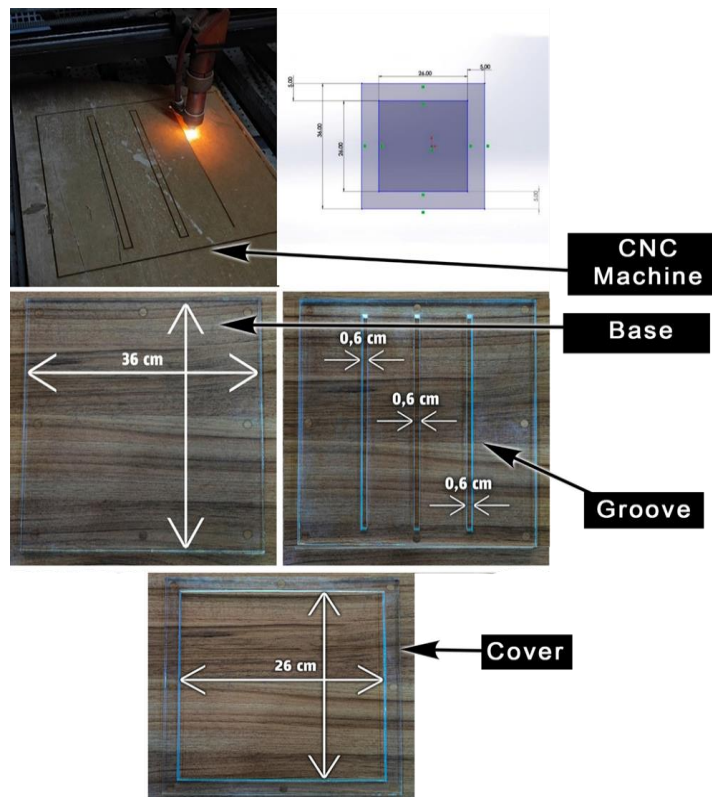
Design an Acrylic mold for fabricating homogenous composite samples
